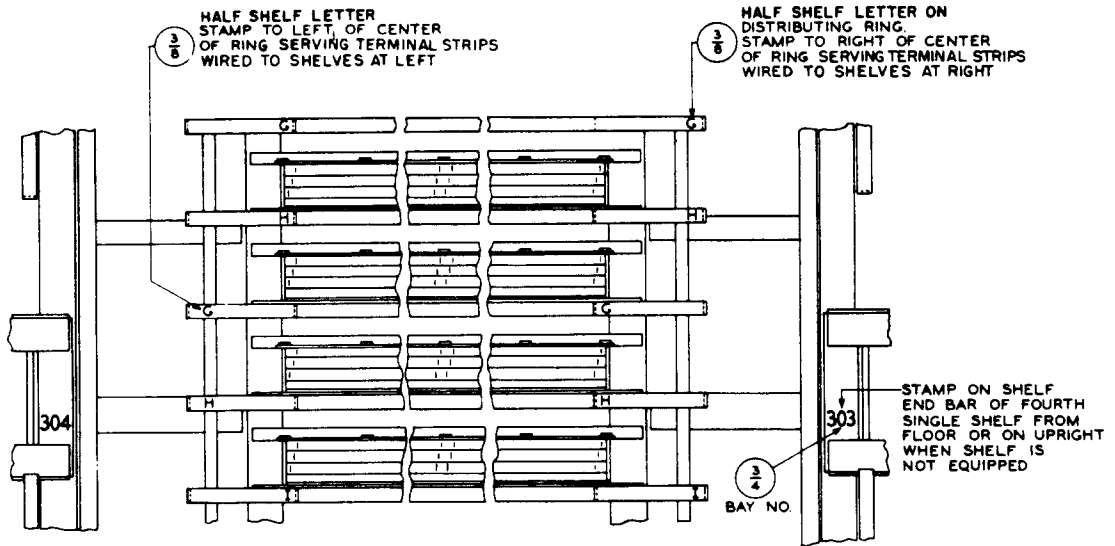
Designations on Rear of Step-by-Step Selector Frames With Distributing Terminal Assembly
